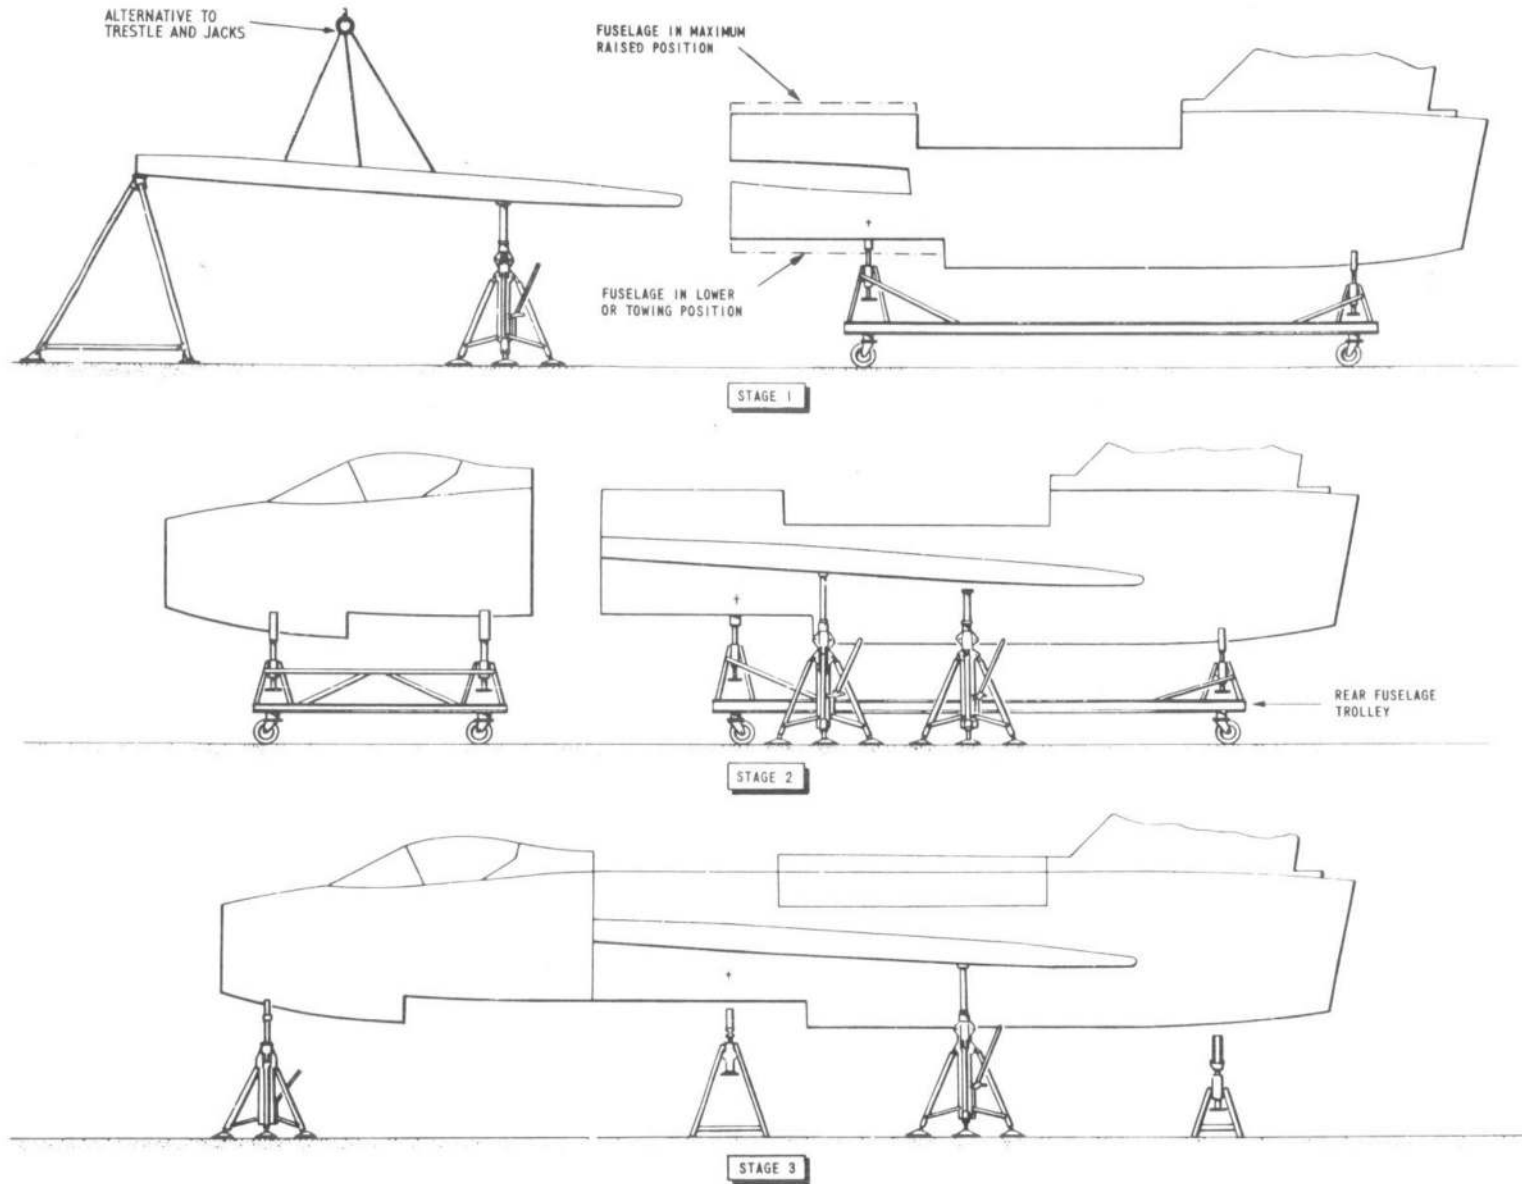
REAR FUSELAGE - REMOVAL AND ASSEMBLY
